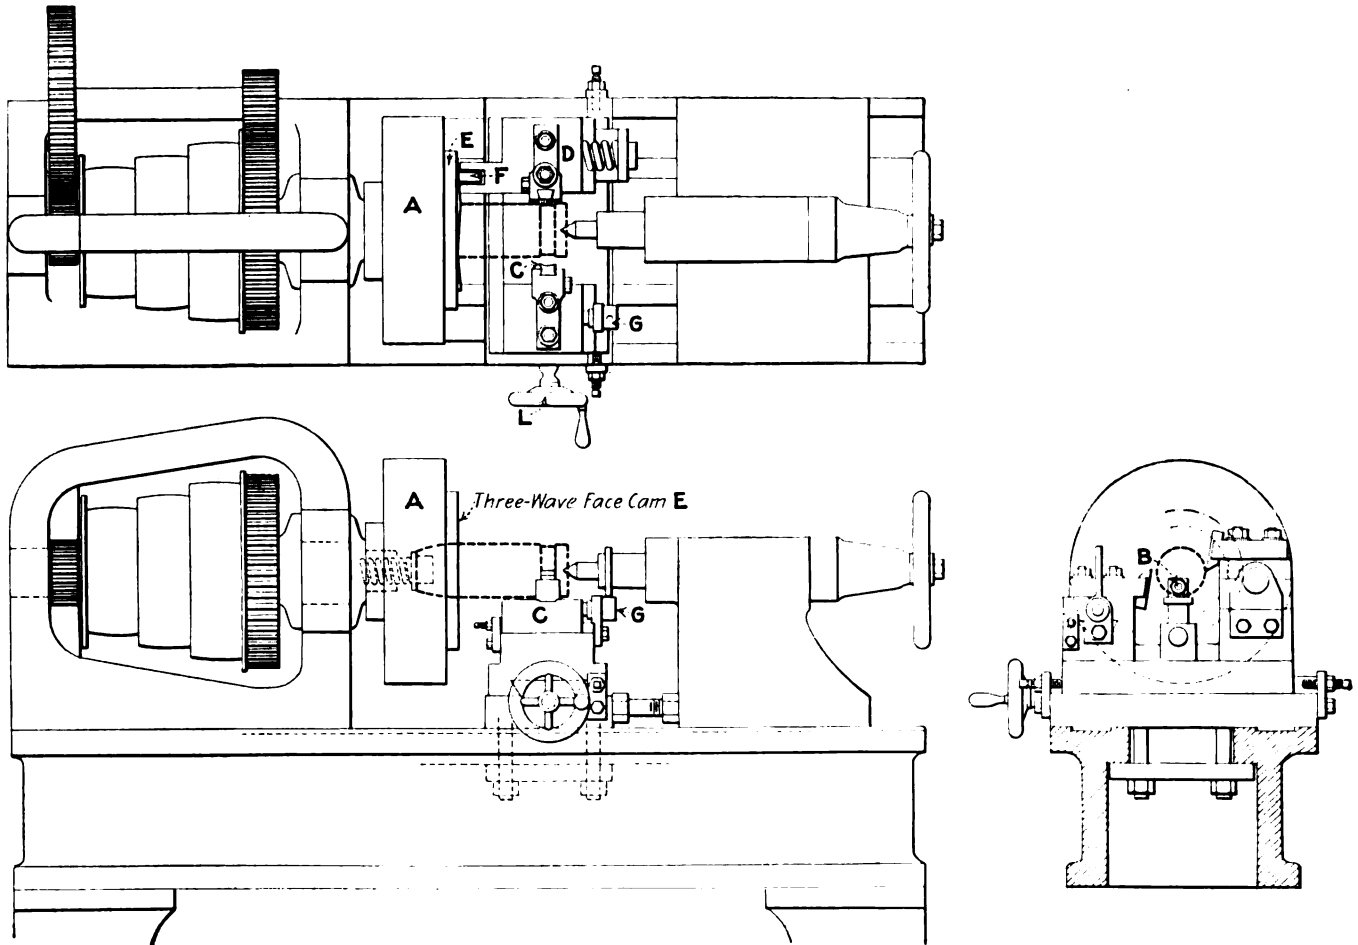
ARRANGEMENT OF GARDNER 20-IN. BY 8-FT. ENGINE LATHES FOR WAVING AND UNDERCUTTING
